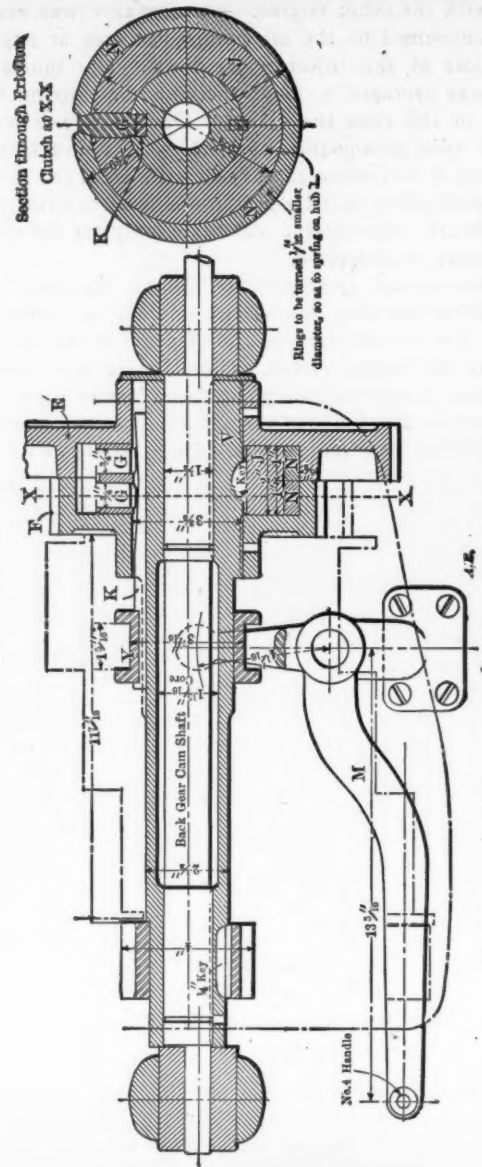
DETAILS OF THE FRICTION CLUTCHES FOR THE DOUBLE BACK-GEAR.
